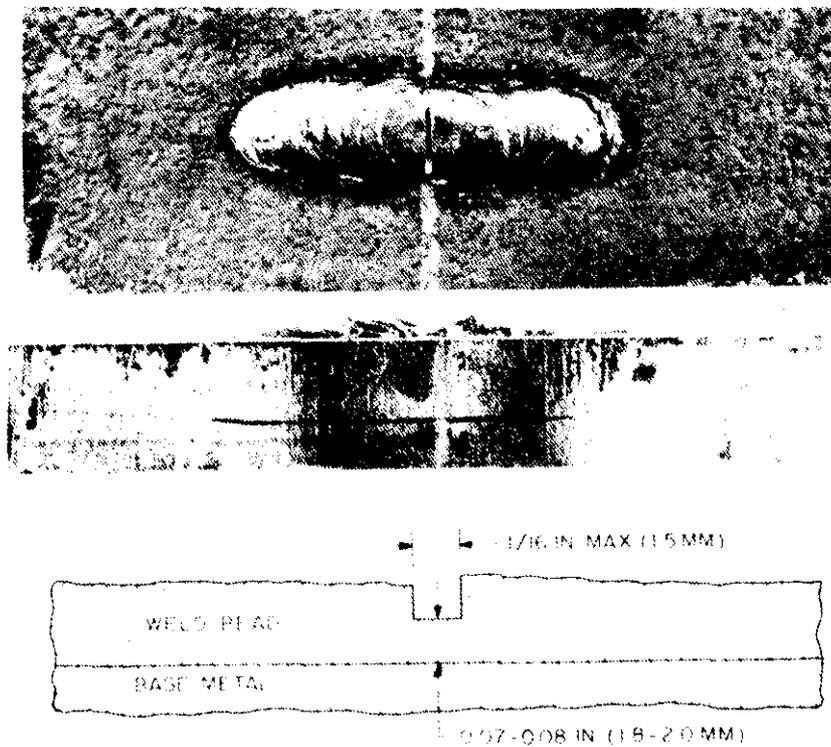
Weld-Notch Details and Example of a Notched Weld.
